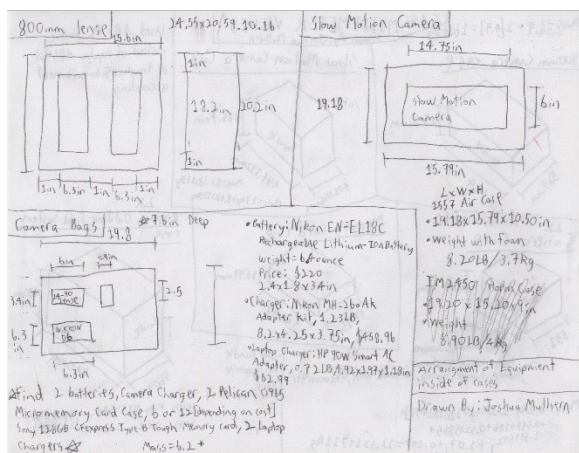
Hand Drawing Arrangement of equipment inside of cases
